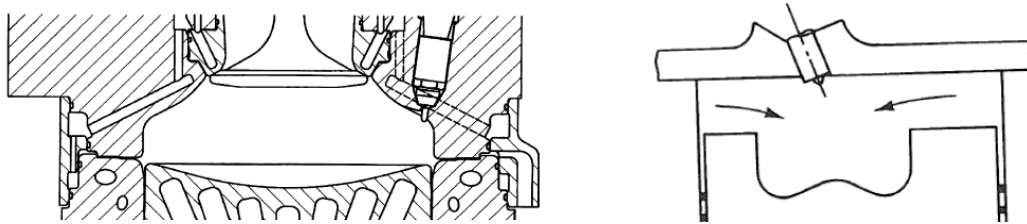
Different combustion chamber geometries. Left: A quiescent type combustion chamber geometry of a large marine diesel engine. Right: A bowl-in-piston type combustion chamber geometry of an automotive diesel engine. The figures are reproduced from [9] (left) and [10] (right).
